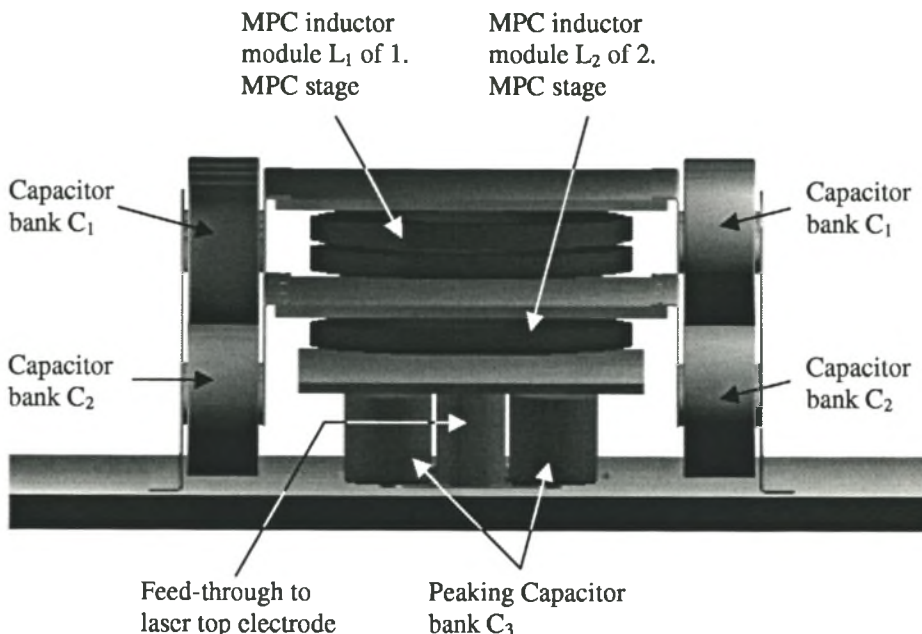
Three-dimensional model of complete MPC unit assembly (front view).
